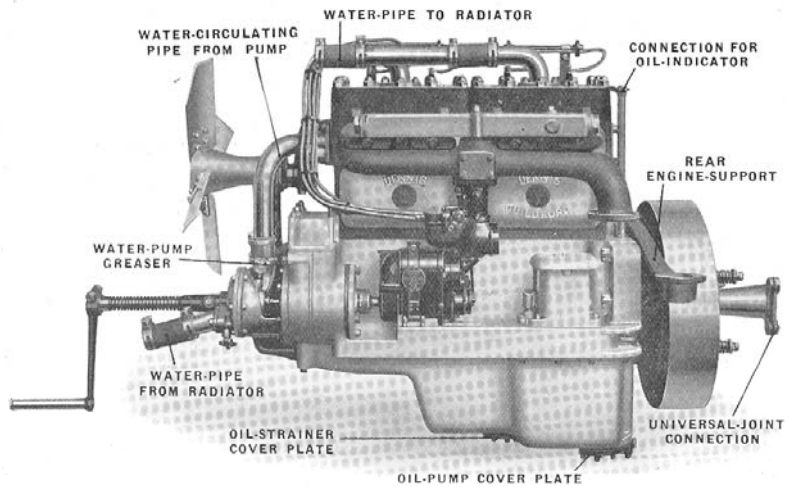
Near-side View of 4-cylinder Engine, complete, as fitted to 350/450 Gallon Fire Engines.
